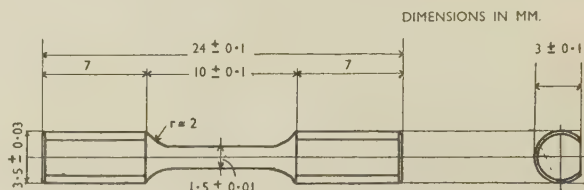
Form of Chevenard Fatigue-Test Specimen.
